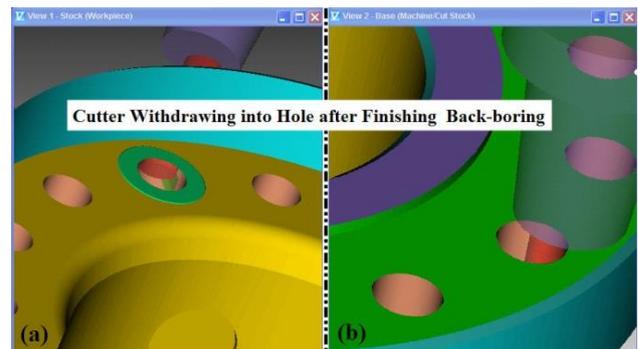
Scenario 3 -- back-boring cutter withdrawing into hole
